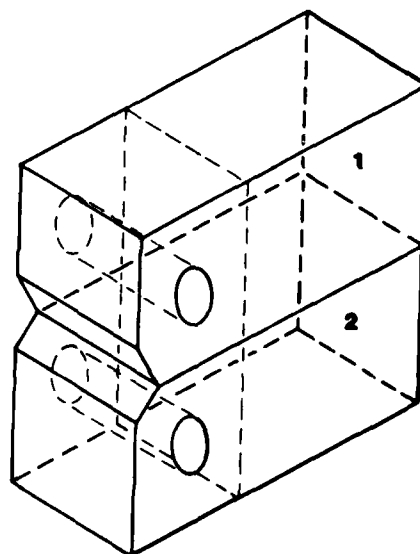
Short Bar Specimen Locations in the Compact Tension Specimen.
